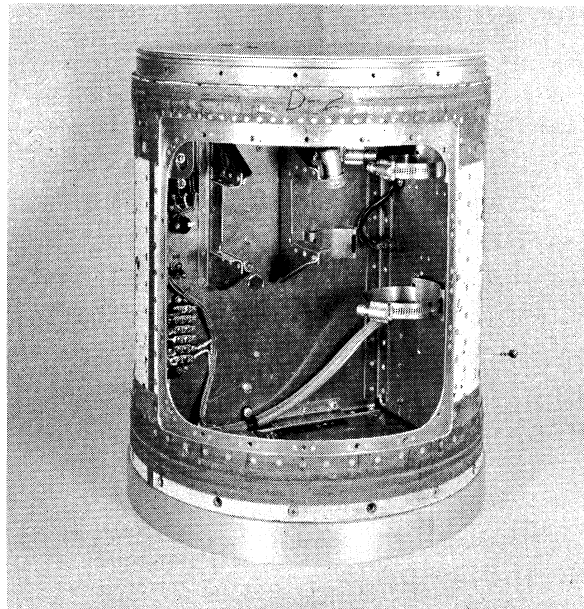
Instrumentation section prior to installation of equipment. All sheet-metal parts are designed as structural members of the complete unit.
